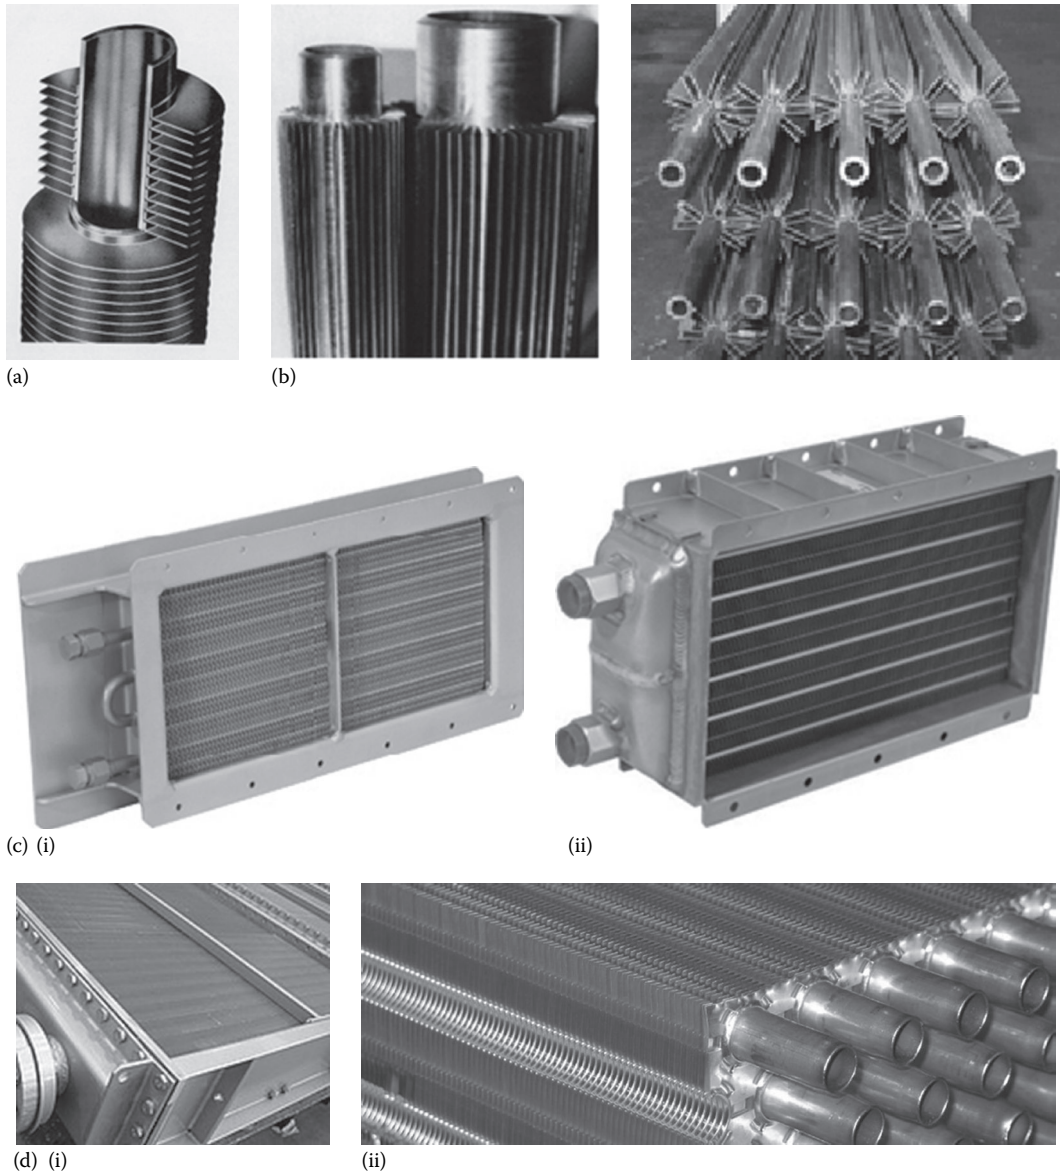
(a) Aluminum L foot tube fin and (b) welded longitudinal fin. (Courtesy of Vulcan Finned Tubes, Tomball, TX.) (c) *Continuous finned* tube heat exchanger—(i) cupronickel tube-fin heat exchanger and (ii) flat-tube heat exchanger to cool hydraulics (ALEX Core). (Courtesy of Lytron Inc., Woburn, MA.) (d) Continuous finned compact cooler. (Courtesy of GEA Heat Exchangers, Catoosa, OK.)
